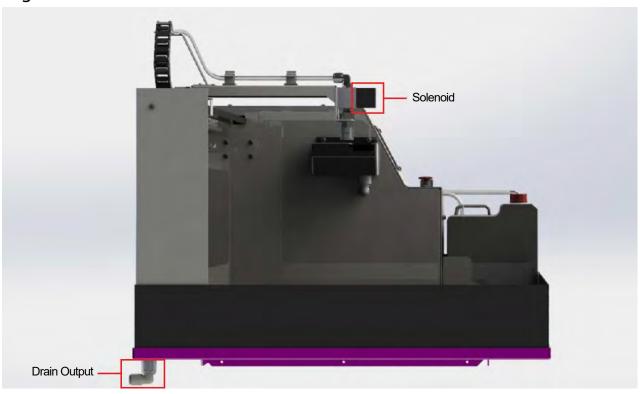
Side View of Direct Treater Air Pretreatment Machine
